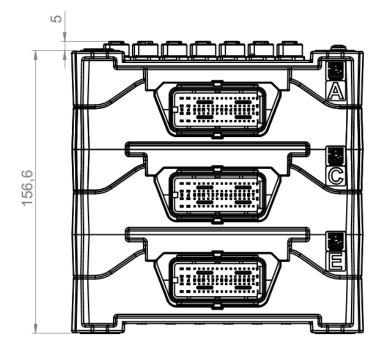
Dimensions of the digsy ${}^{\ensuremath{\mathbb{B}}}$ fusion housing – LARGE – side view
